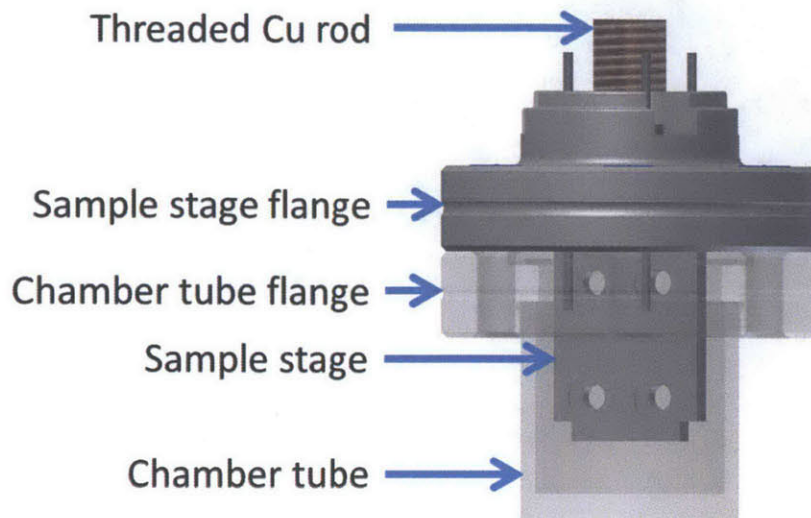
Sample chamber assembly. All components except the Cu threaded rod were 304 stainless steel.
